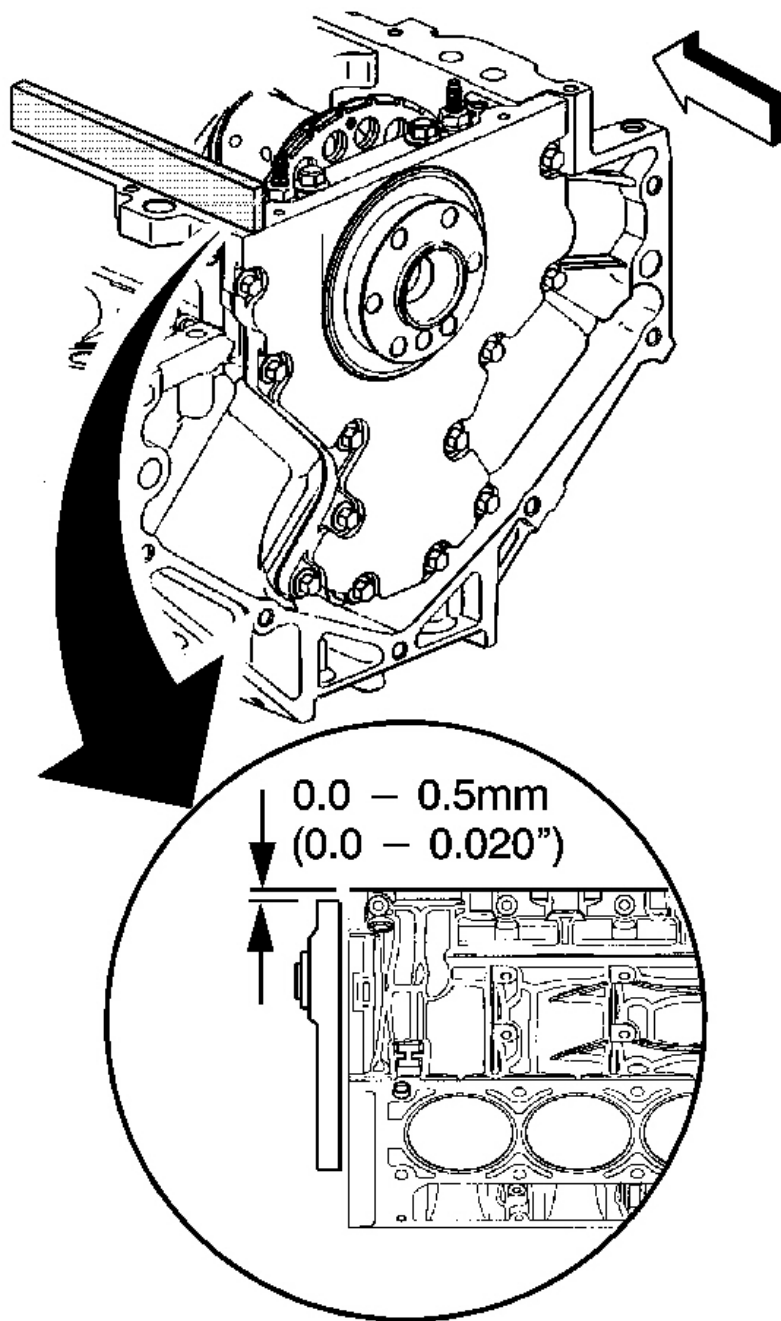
View Of Rear Cover-To-Engine Block Proper Installation Position
